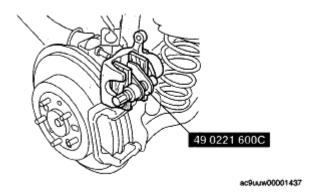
Pushing Piston With SST Courtesy of MAZDA MOTORS CORP.
